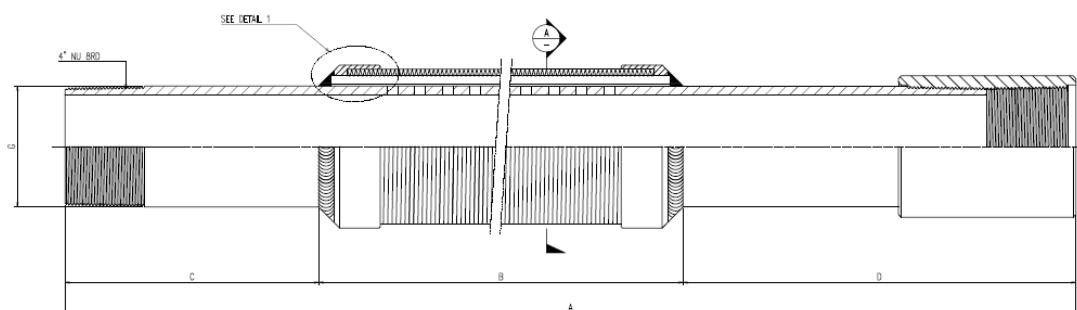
Drawing design of wirewrapped PBS 2-7/8" (slot opening 0.0394" & 0.012")
